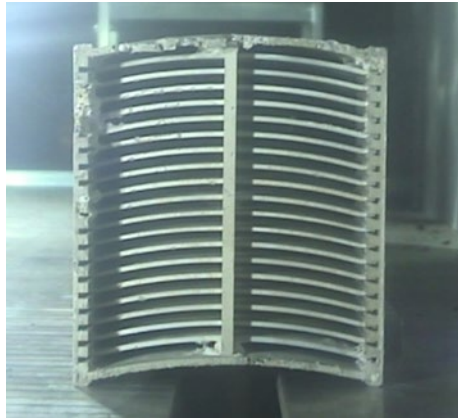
ENEA ISPRA Assembly 3-9-IX showing end grain attack.
